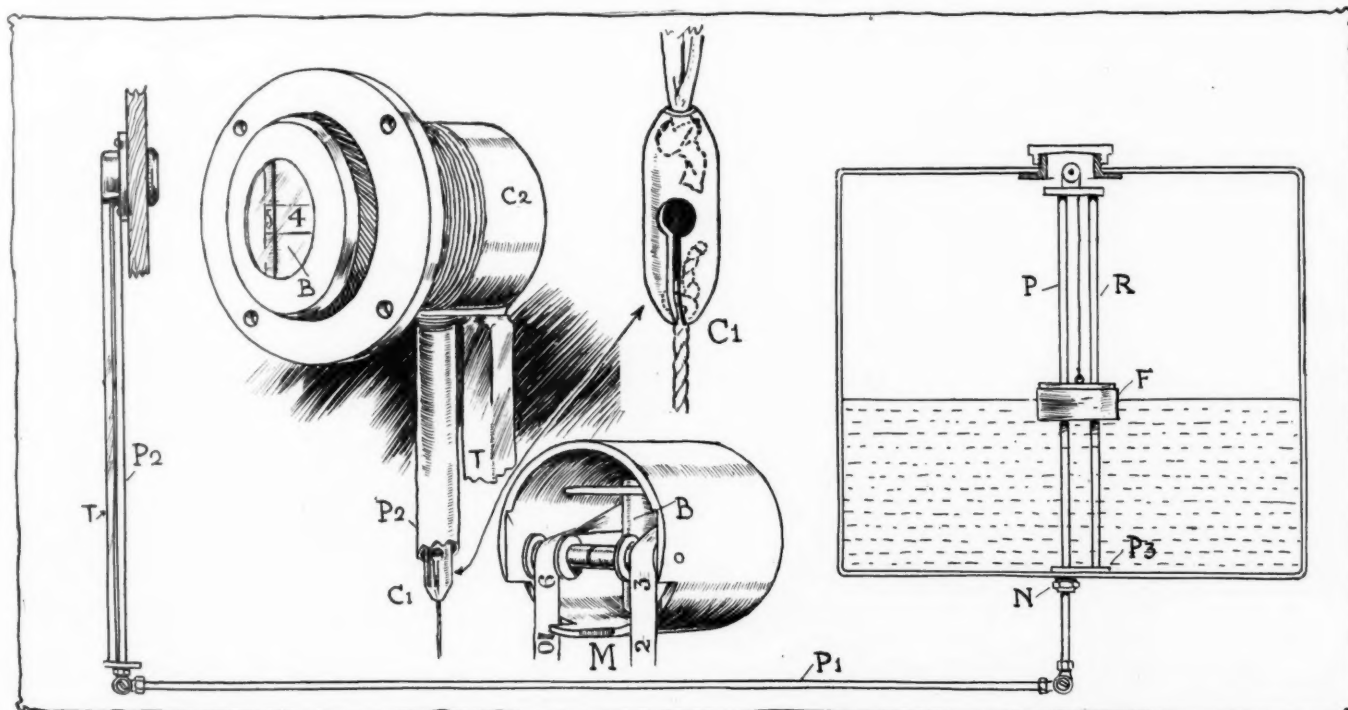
Arrangement of the Smith gasoline meter, showing connections between tank and dashboard indicator and principal parts
